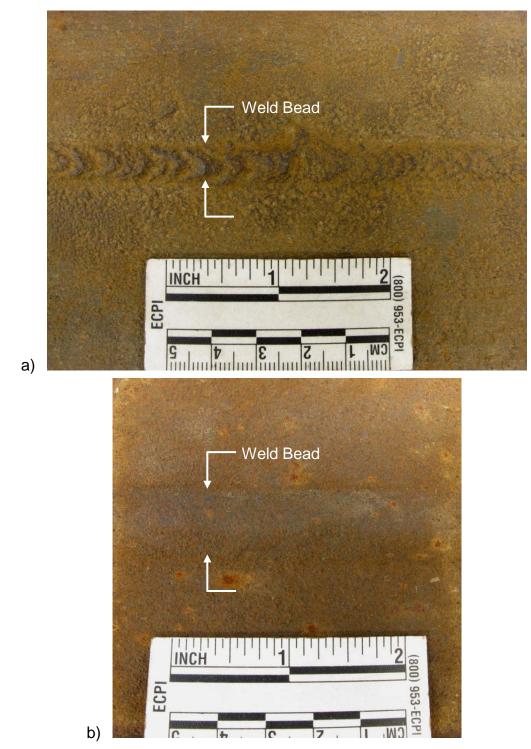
a) Longitudinal weld bead observed on the inside of pup 5; b) Longitudinal weld bead observed on the inside of pup 6.
